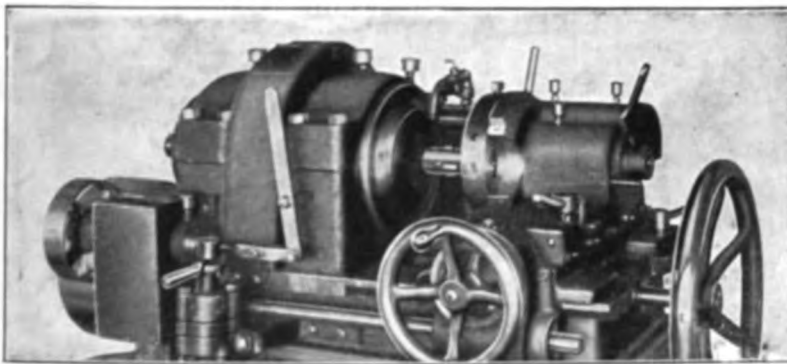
SHELL-NOSING LATHE FOR 11-IN. SHELL
